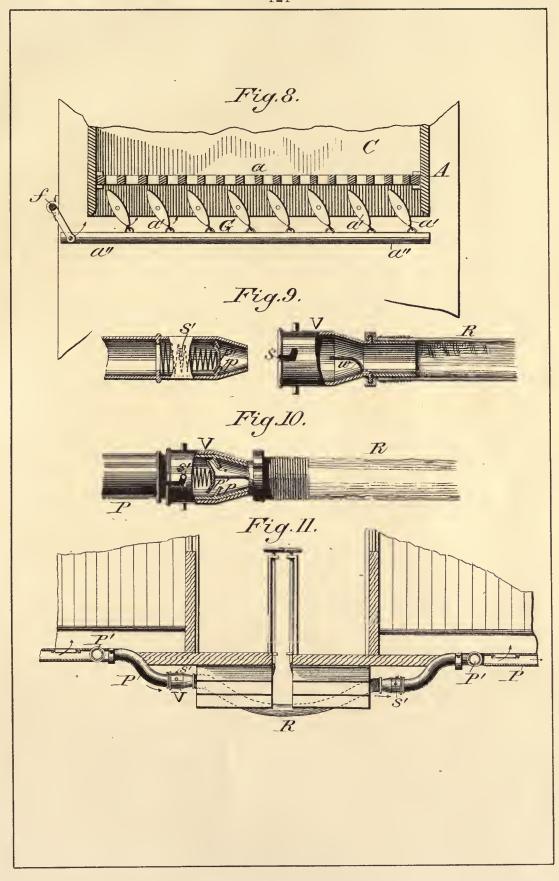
shows this coupling united, the interior rod W pushing back and opening the valve as the coupling-sleeve is advanced to its proper position.
